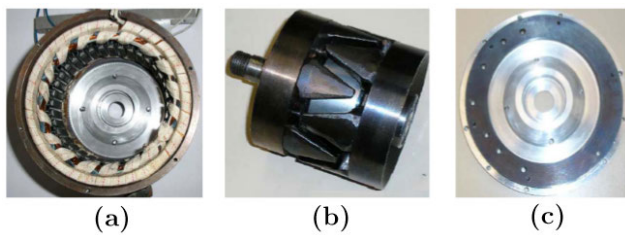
Prototyped machine. Legend: (a) stator, (b) rotor, (c) a flask showing the magnetic collector (in black).
